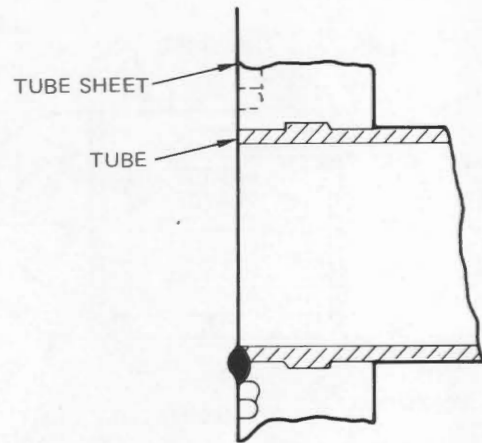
Rolled-and-welded joint schematic.
